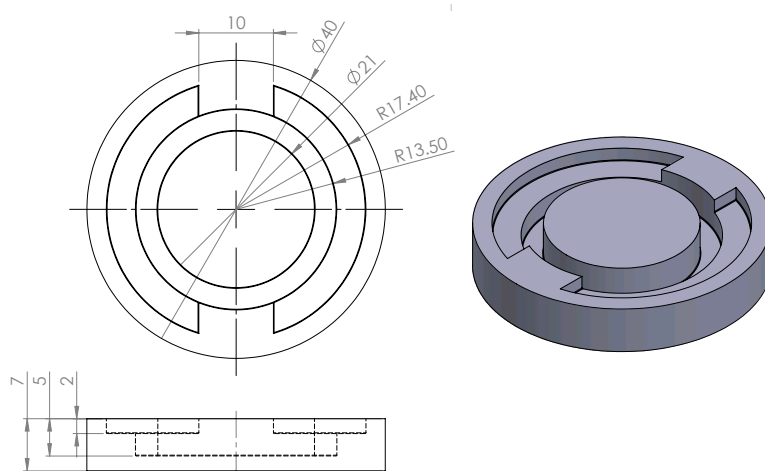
Engineering drawing of the PDMS mould. Dimensions are in mm.
